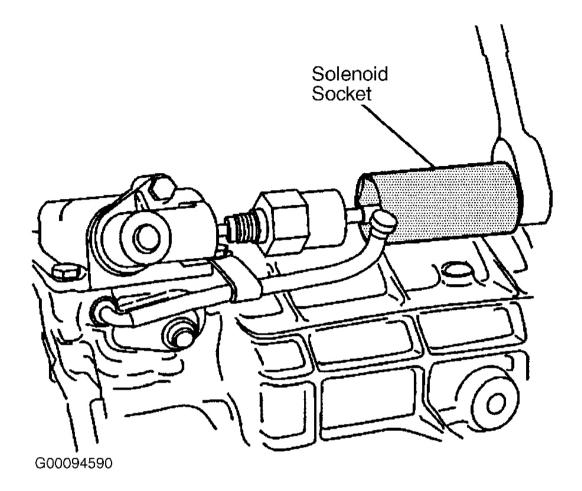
Removing & Installing Reverse Lock-Out Solenoid Courtesy of GENERAL MOTORS CORP.
